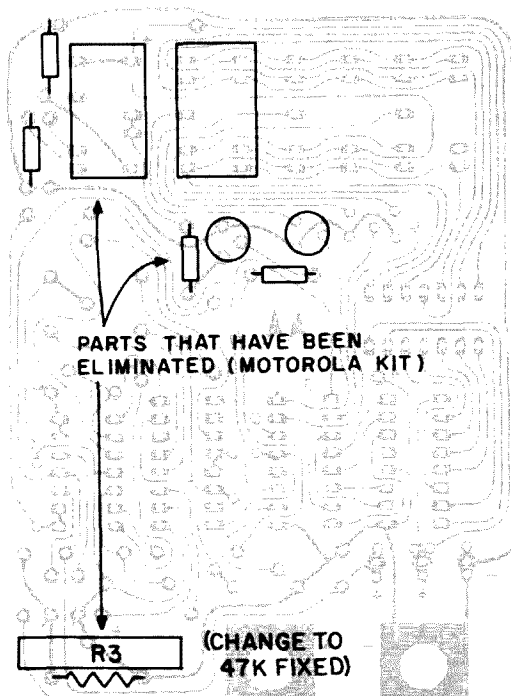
(b). Component side of the Motorola board showing which parts are not used.
